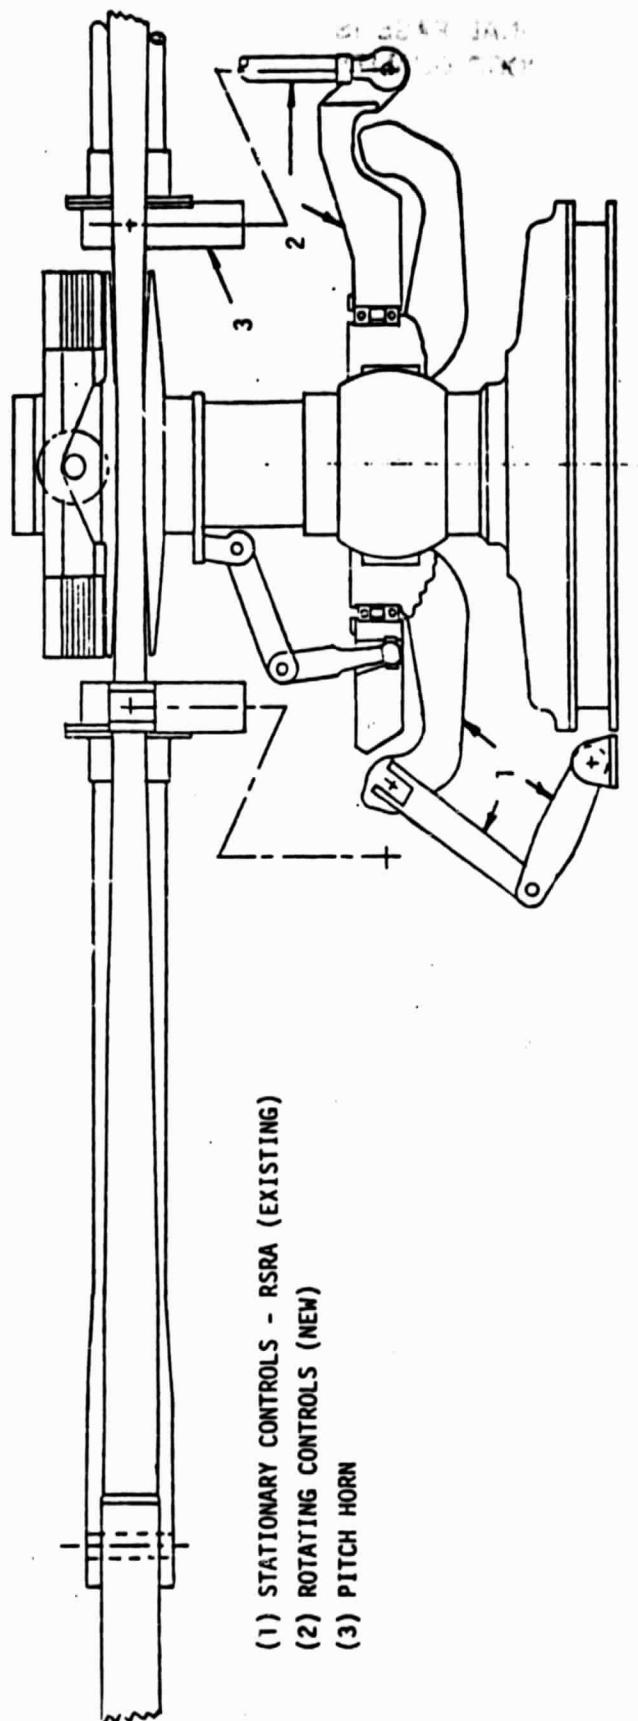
Elastic Pitch Beam Rotor Head - Plan View & Sections
